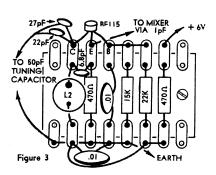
Wiring and component layout for the local oscillator board. A 2-pin socket is provided for the oscillator coil.
